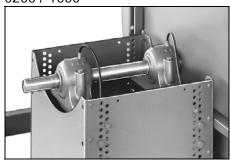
Self aligning double row bearing in a Plummer block housing
